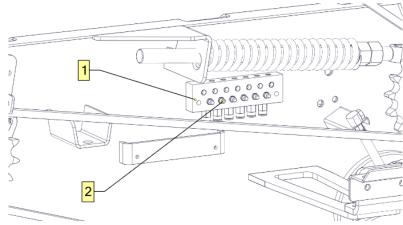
Central lubrication of bearings on the left-hand side of the baler
